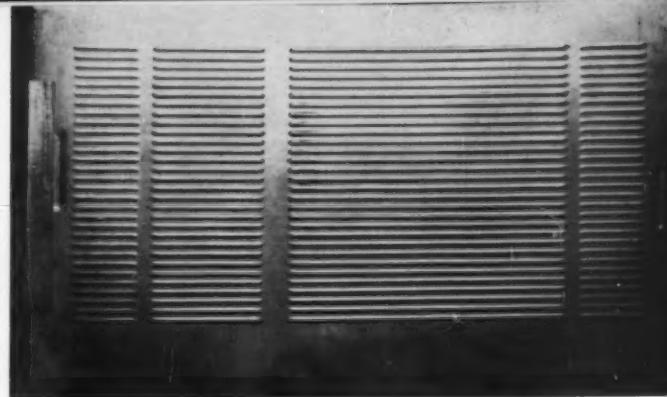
Corrugated Air Duct Panel of Type 321 Stainless Steel 0.030 In. Thick Made by Explosive Forming at Orenda Engines Ltd. Panels like this have also been made of AM 350 stainless steel, titanium and aluminum
